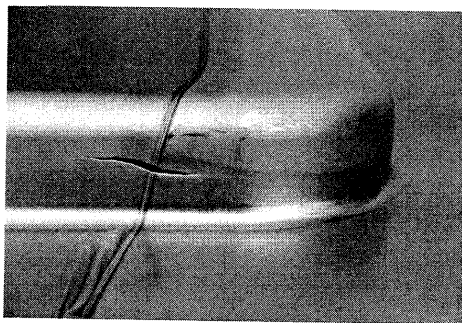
Fracture in the weld perpendicular to the weld (type B)
